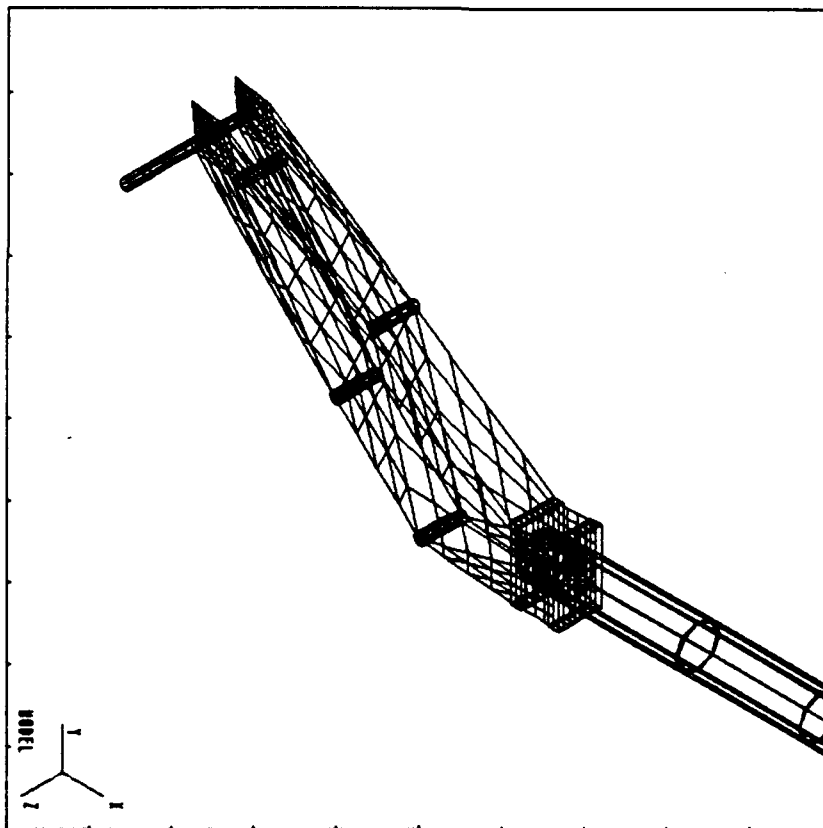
Schematic Drawing of the Bruiser Tail Rotor Assembly
